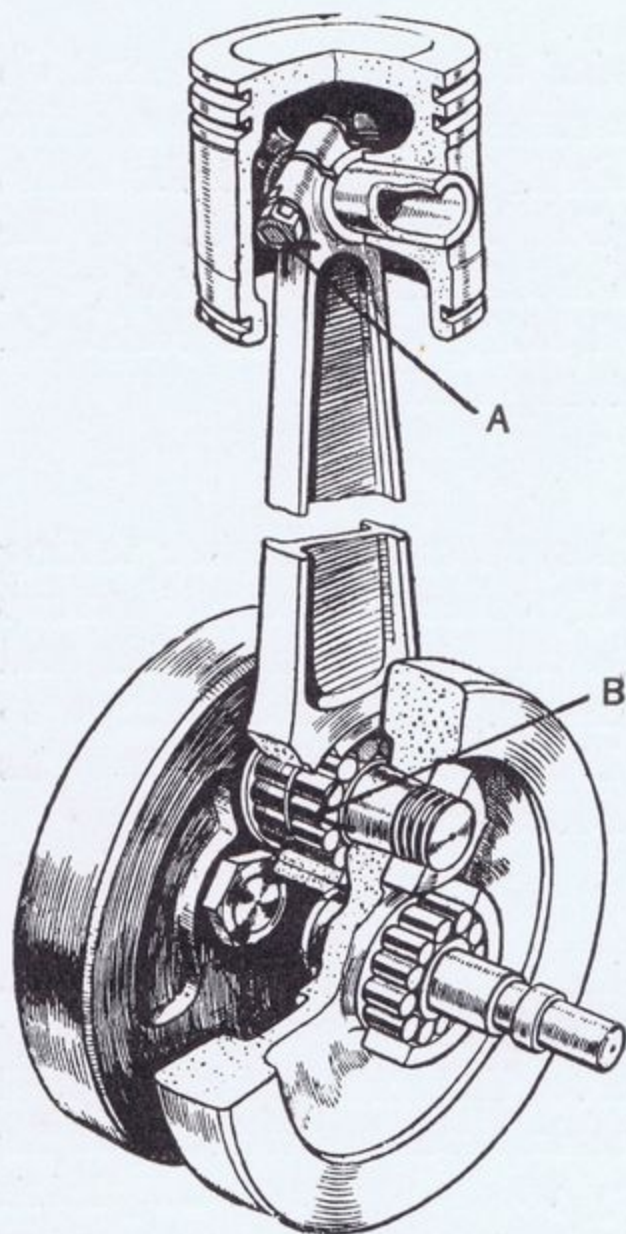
DETAILS OF CRANKSHAFT, CONNECTING ROD AND PISTON.
